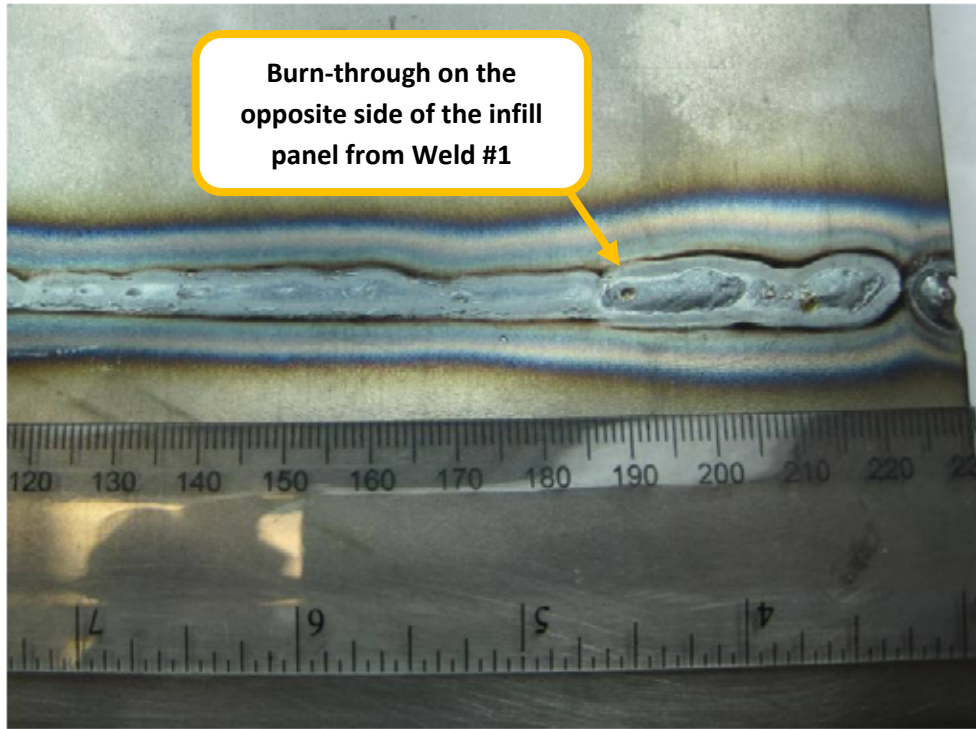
Infill Panel Opposite Weld #1, No Chill Strip Used During Welding
